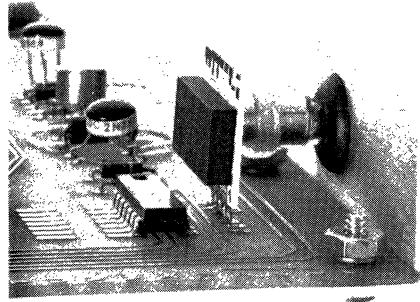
PX6(D) in PC Board for Dip Soldering
